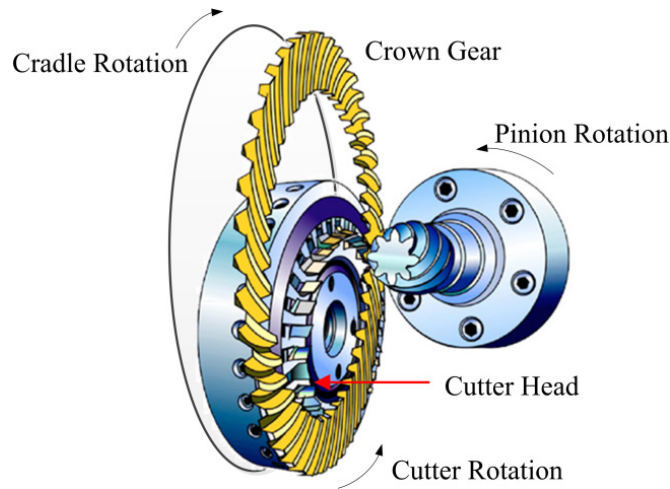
Generated method for the face milling of hypoid pinions [58].
